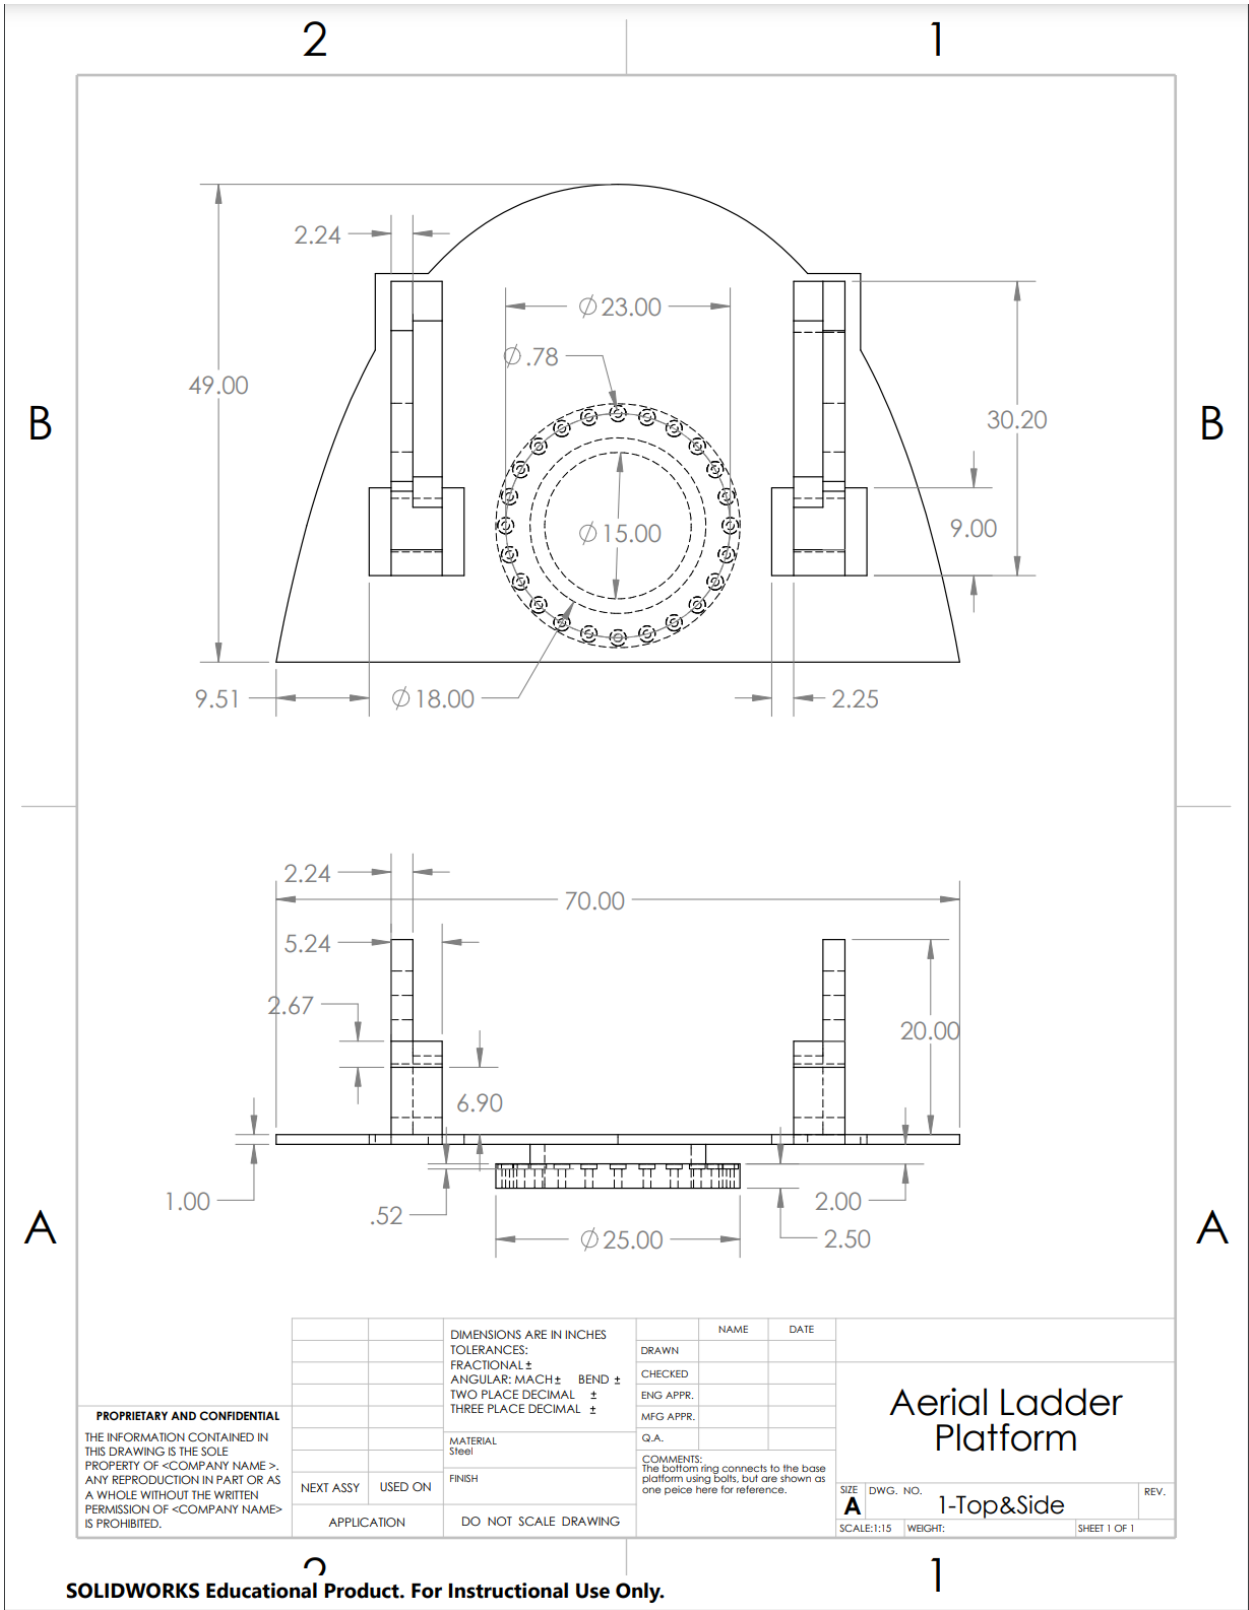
Top and Side Views of the Dimensioned Drawing of the Aerial Ladder Platform
